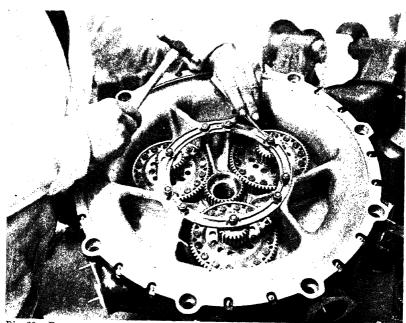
Bending up tab washers to lock intermediate gear support bolt nuts.
